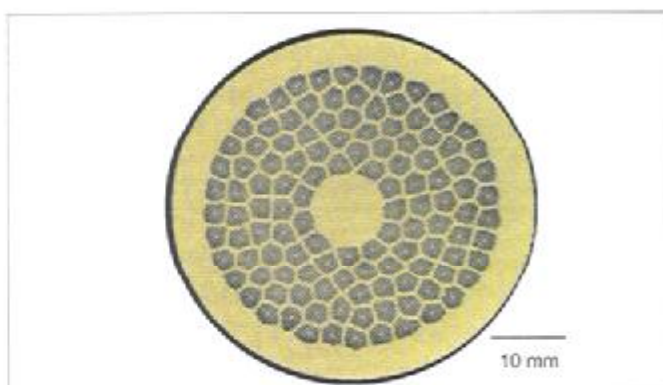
Cross section of superconductor wire in production stage after hot extrusion. Bronze matrix contains $120 \times 84 = 10\,080$ Nb filaments, with courtesy to Vacuumschmelze GmbH Co KG, Hanau, Germany
